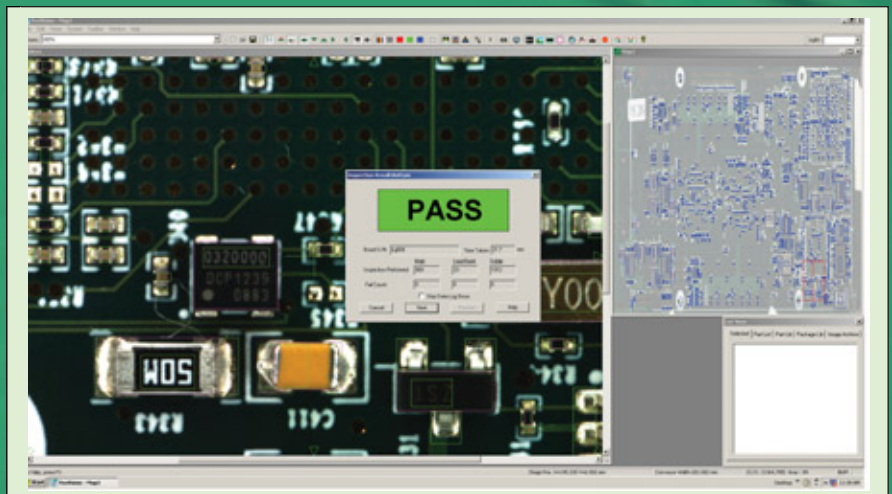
An AOI system verifying every component on a PCB and then “passing” the board.
